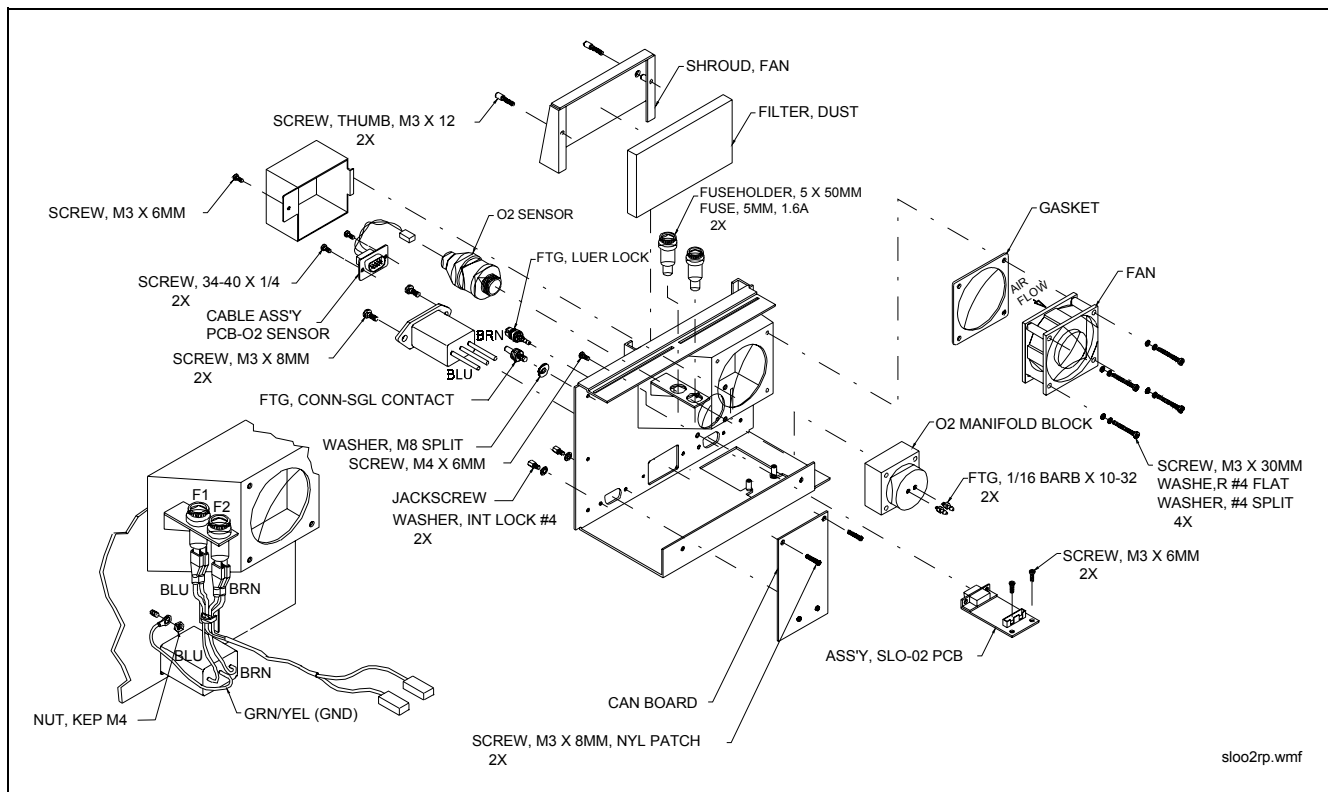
MULTI GAS Module Rear Panel Subassembly
